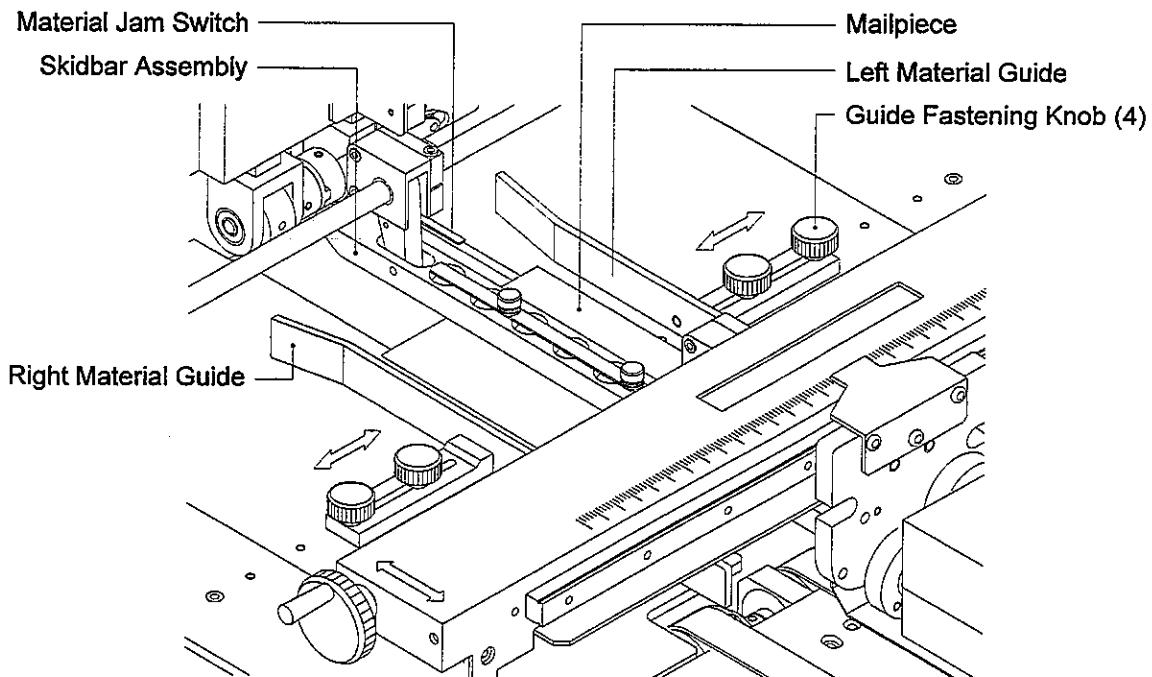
Outfeed section of the feed rollers illustrating the material side guides and the skidbar.
